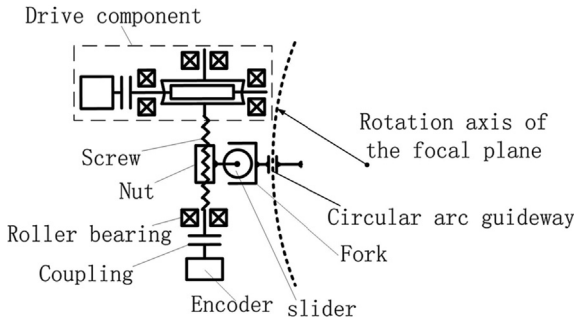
Schematic model of the drift-angle compensation mechanism.
